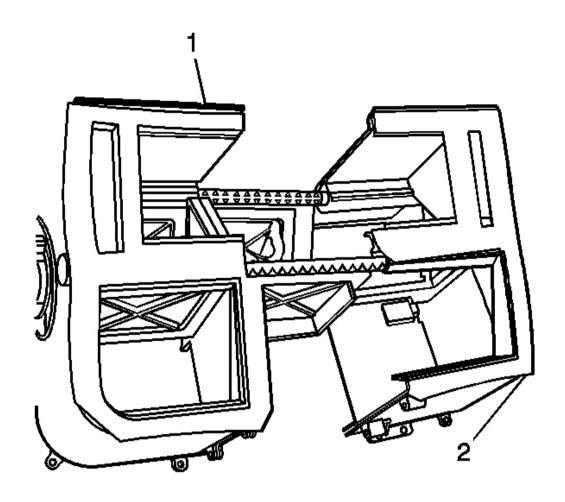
Screws & Air Distribution Housing Courtesy of GENERAL MOTORS CORP.
